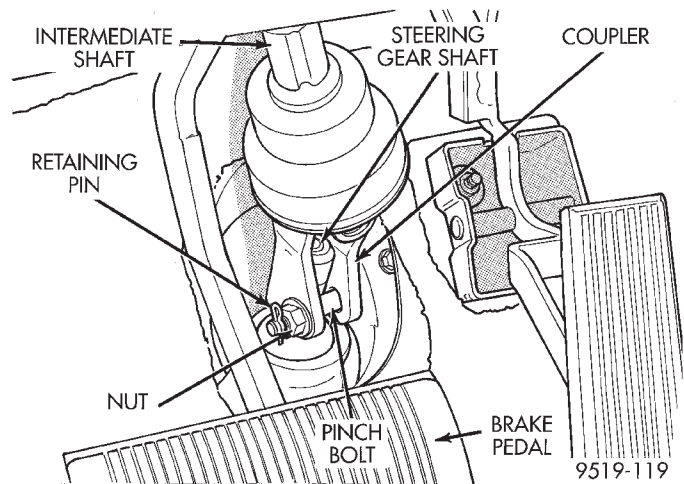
Intermediate Shaft Coupler To Steering Gear Attachment
